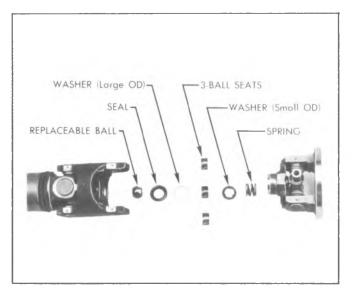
A-27--Exploded View of Centering Ball Mechanism
